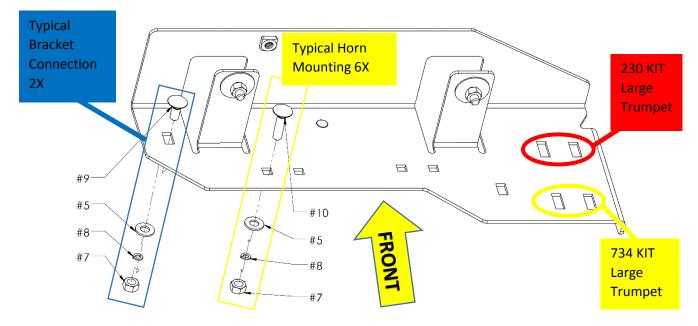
TUNDRA-201 to TUNDRA-301 Hardware Connections; Exploded Views
